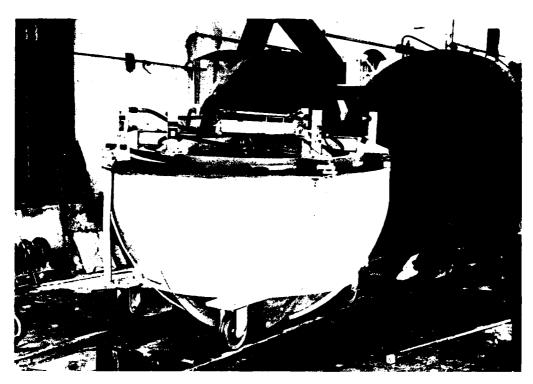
Mold assembly leaving autoclave after polymerization of casting, note hydraulic pump for applying pressure to hydraulic jacks and wooden blocks for keeping raised male mold from resting on casting.
